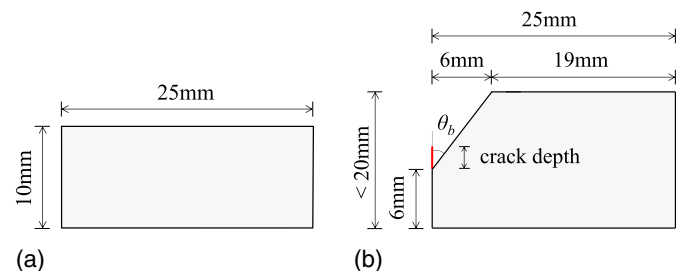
Backing bar geometry: (a) conventional detail; and (b) beveled detail.
